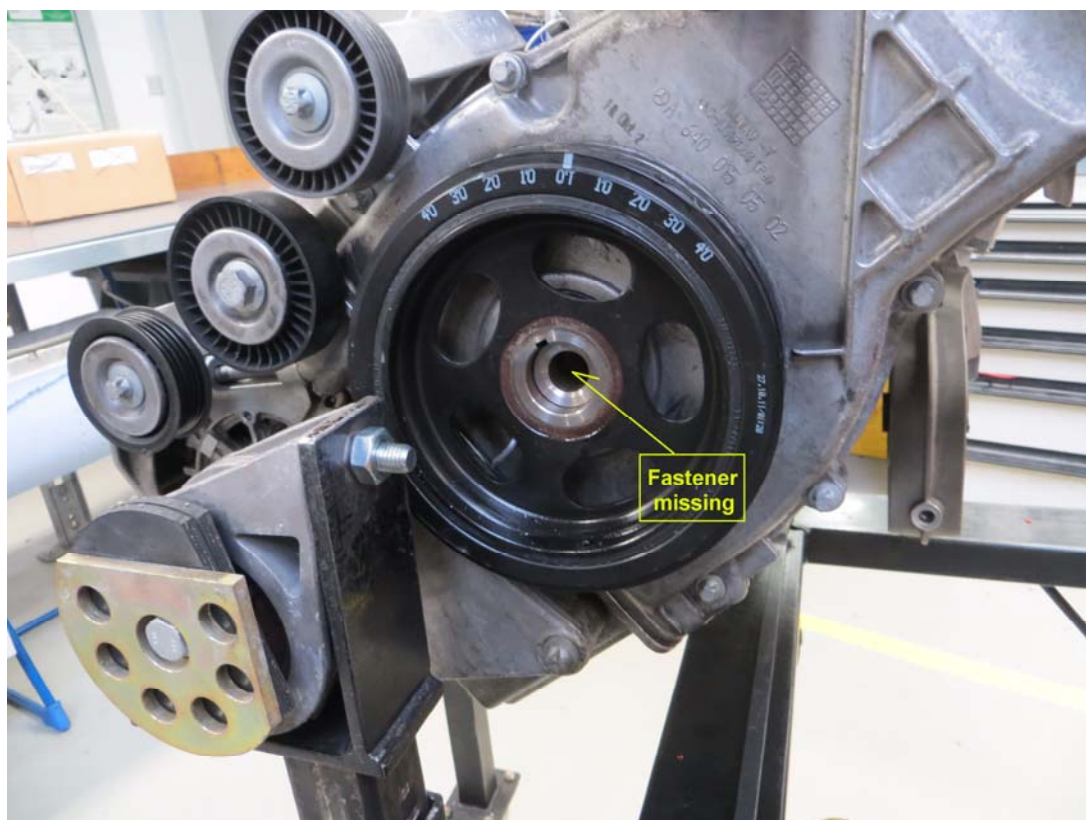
Missing the fastener that attaches the belt pulley to the crankshaft
